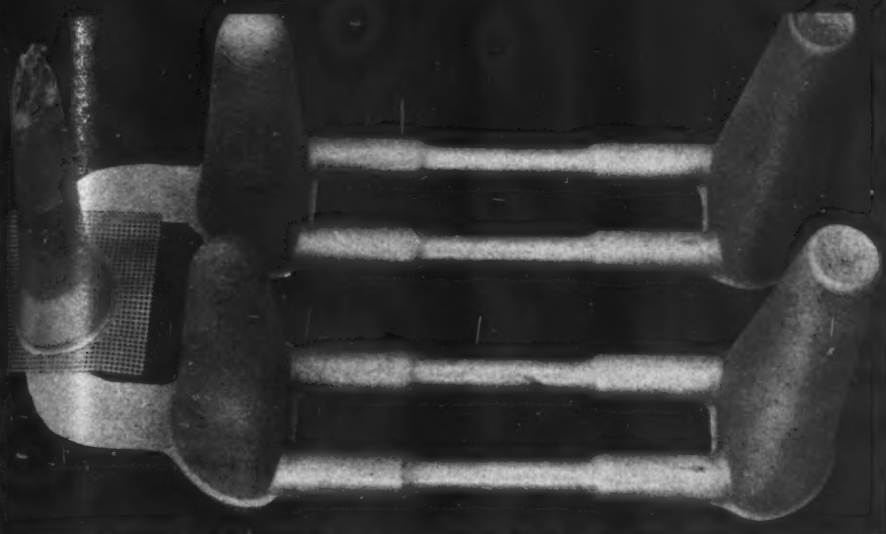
Photograph of the four-bar pattern test-bar casting.
